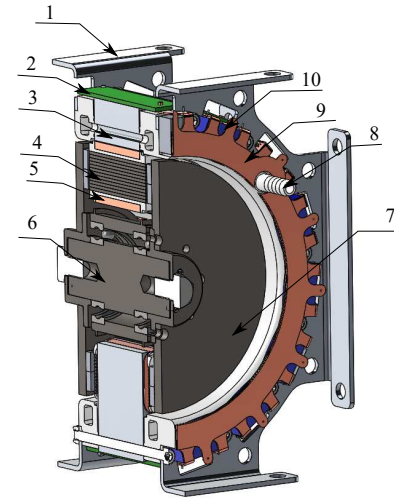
The proposed integrated drive: (1) Mounting structure, (2) Converter module PCB, (3) Cooling channel, (4) Core, (5) Winding, (6) Shaft, (7) Rotor disk, (8) Cooling fluid injector, (9) DC link Bus bar, (10) DC link Capacitor
